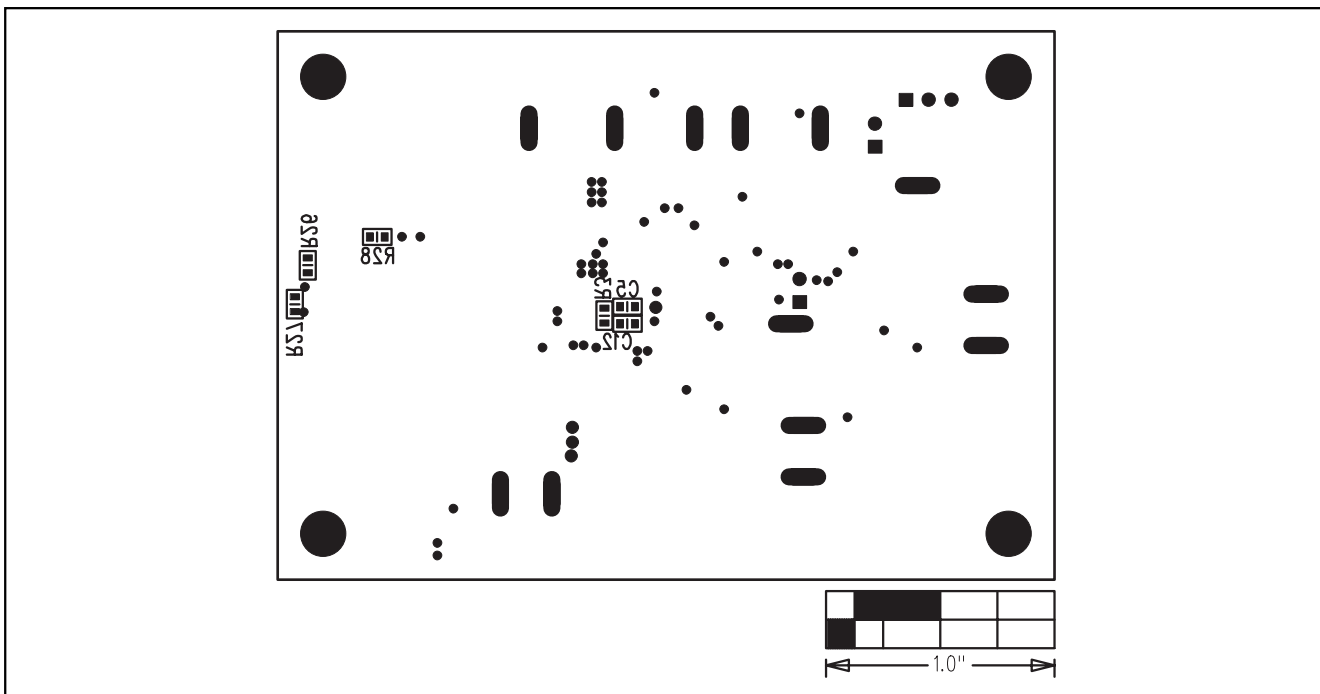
MAX8513 EV Kit Component Placement Guide—Solder Side
